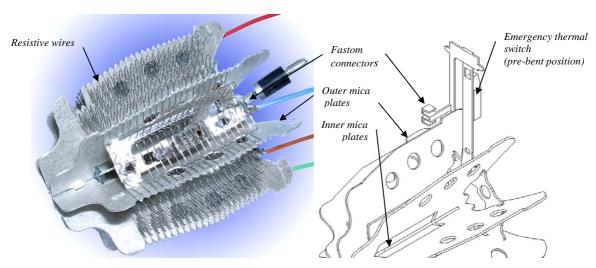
Heat coil to be assembled (photo of final product and schematic picture, without wire)
